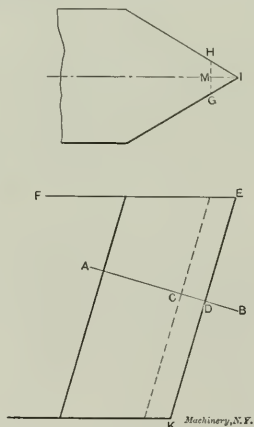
U. S. Standard Thread Tool before Grinding Flat.
